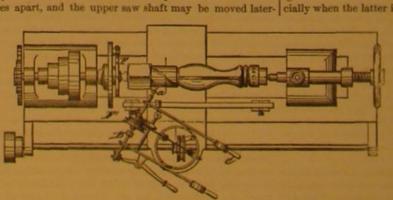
CARVING ATTACHMENT FOR LATHES.
